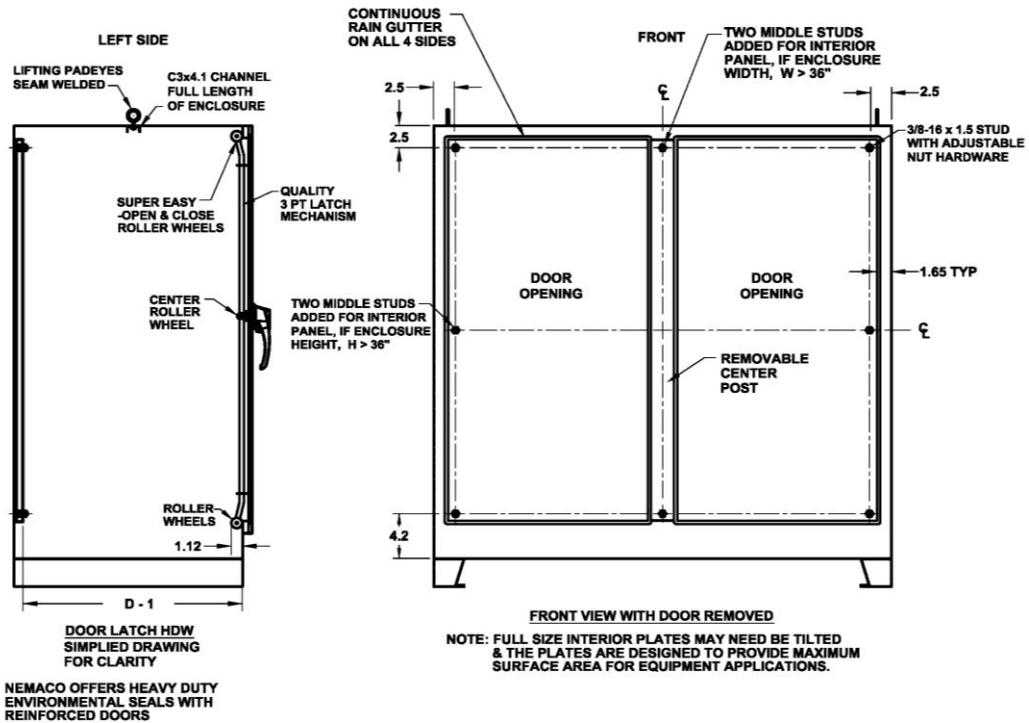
NEMA 4X - "PCE" STAINLESS STEEL ENCLOSURE - INTERIOR DIMENSIONS & HARDWARE
